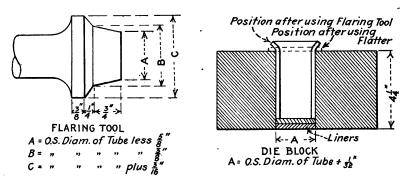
Details of Flaring Tool and Die Block required for Making Flange Tests of Boiler Tubes
